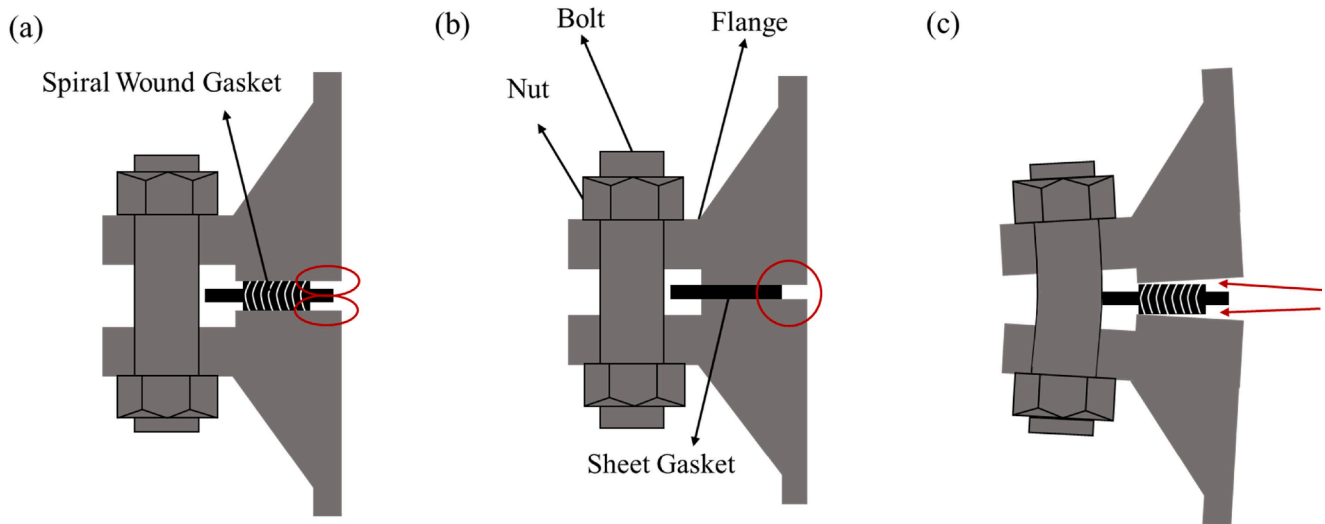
Schematic of vulnerable places for crevice corrosion between gaskets and flanges: (a) standard spiral wound with inner ring-crevice at ID; (b) standard cut-sheet gasket-crevice at ID; (c) crevices above and below spiral wound inner ring (Worden, 2014).
